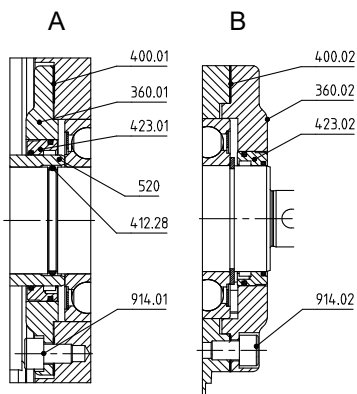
Model with bearing bracket sealed by Labtecta sealing elements
